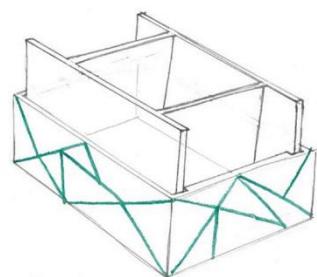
, ASSEMBLY INNER AND OUTER BOX
